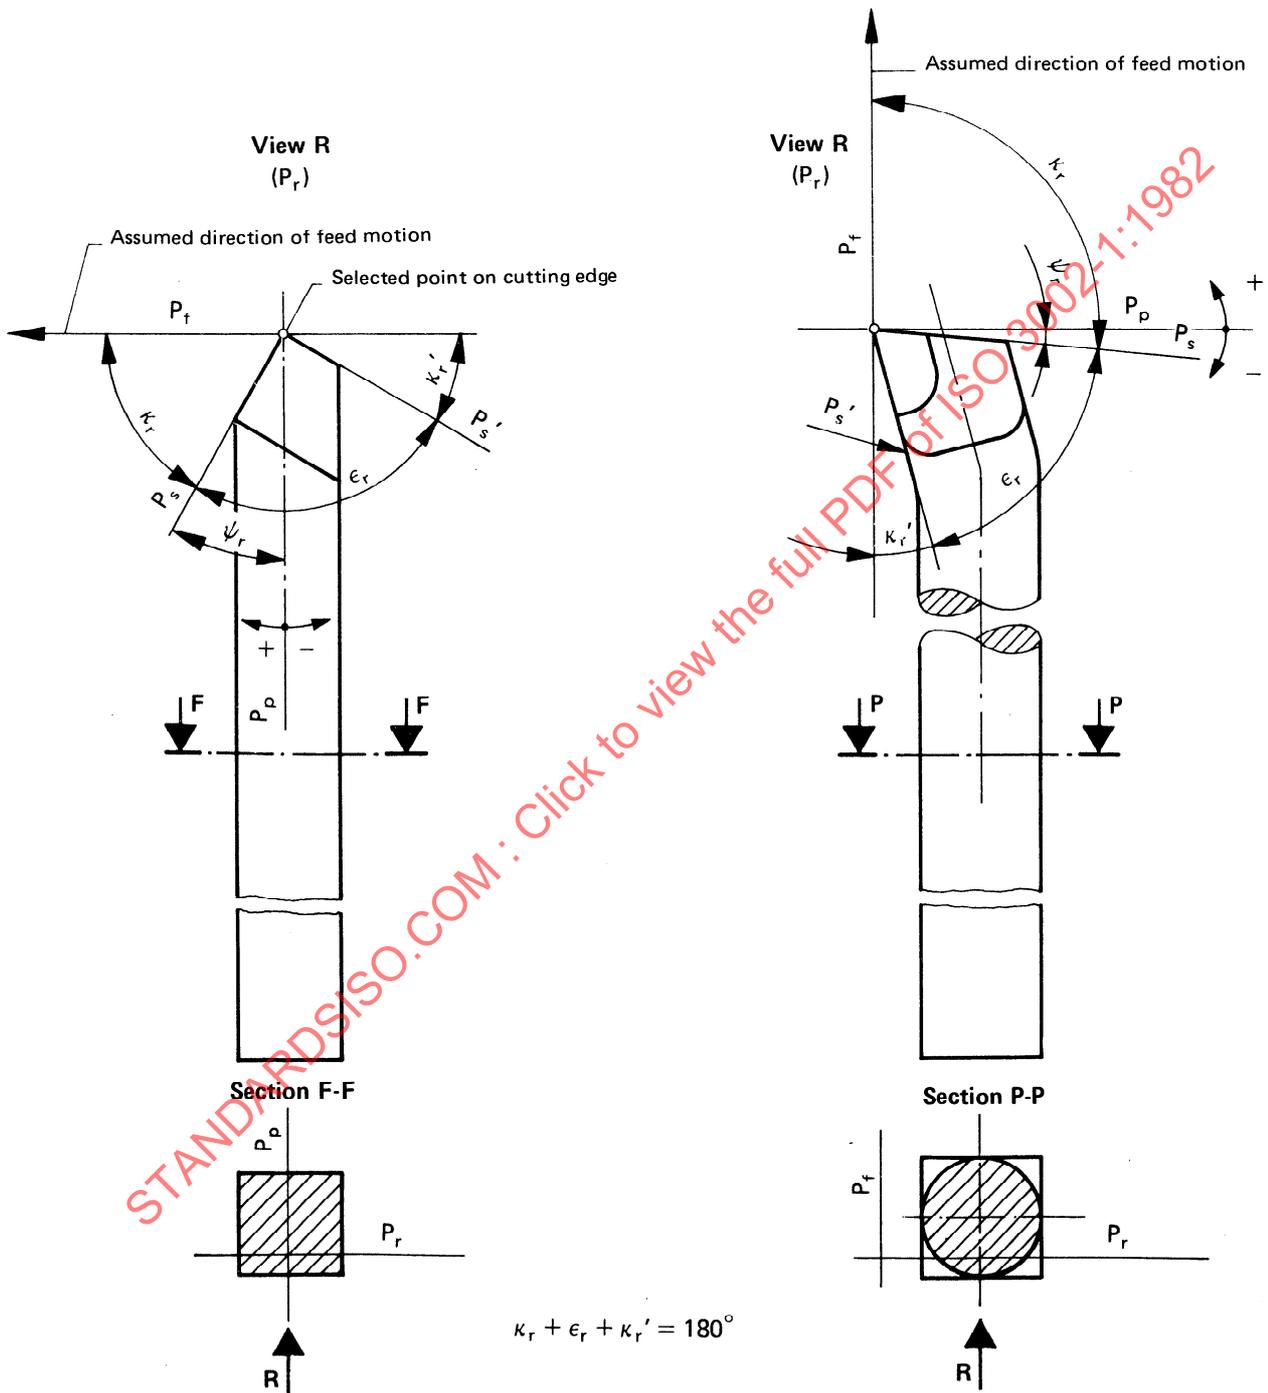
Tool cutting edge angle κ_r and tool approach angle (tool lead angle) ψ_r
